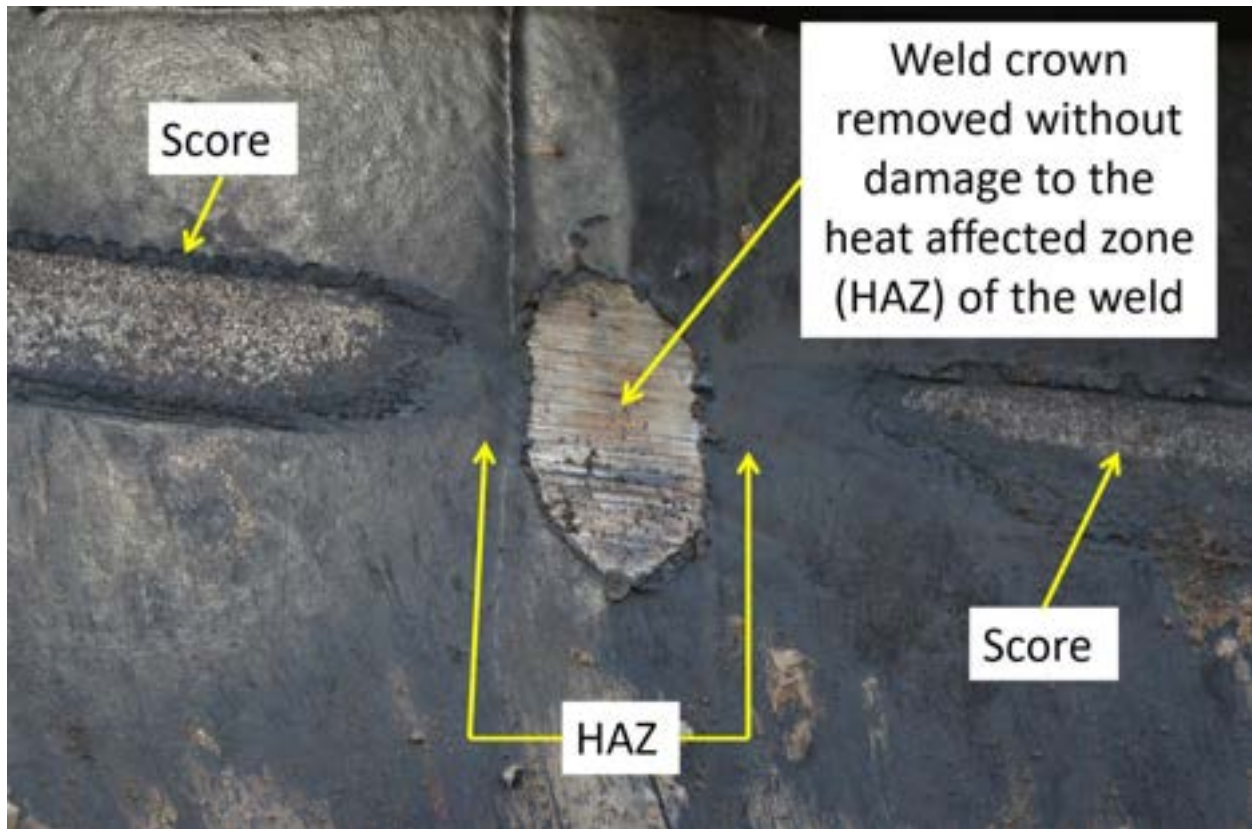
The removal of metal at a girth weld crown is not critical.²⁵
